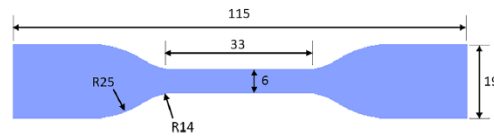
Dimensions of the tensile test specimen following the ASTM D638, type IV standards. The dimensions are expressed in mm, and the specimen's thickness is 3.20mm. Adapted from reference (3).
